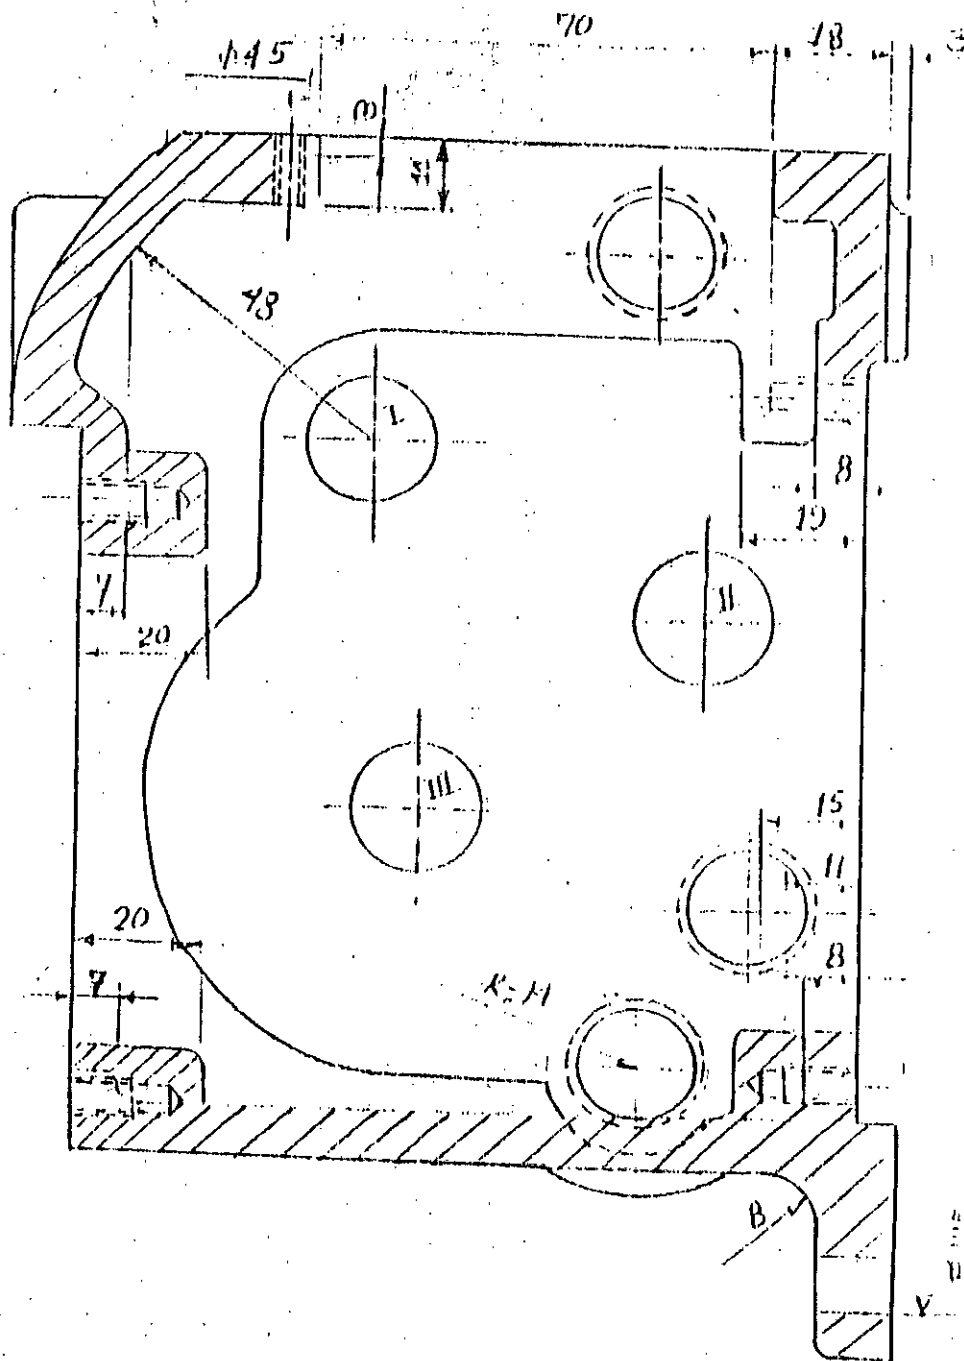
SECTIONAL VIEW (CD) OF FEED GEAR BOX
